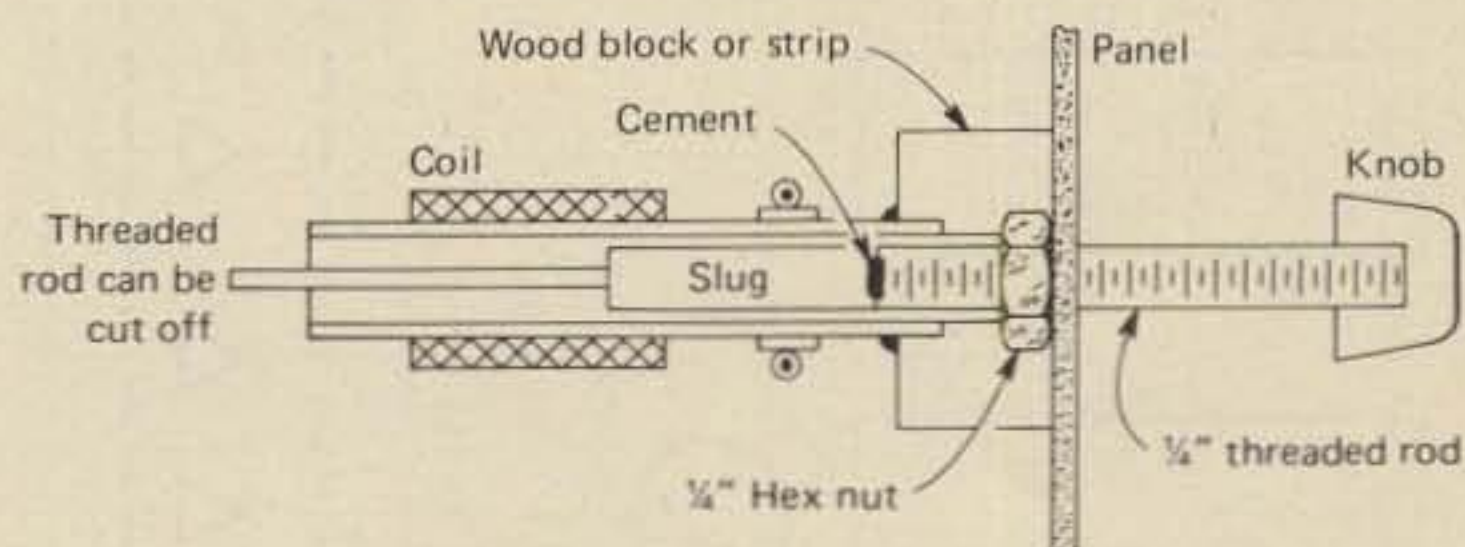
Cross-sectional view of the completely assembled adjustable slug tuned coil. Care must be taken in the alignment of the slug and rod when gluing.
